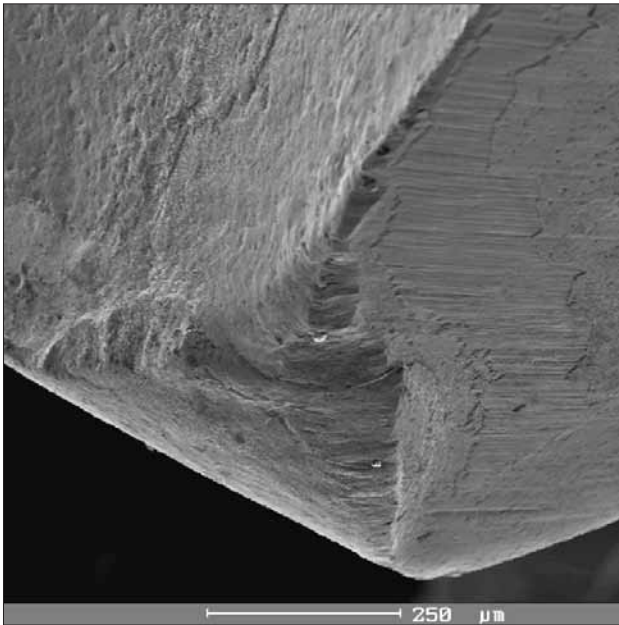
Damage to the cutting edge of the tool, $v_c=80$ m/min, $a_p=2,75$ mm, $f=0,08$ mm per rev.
